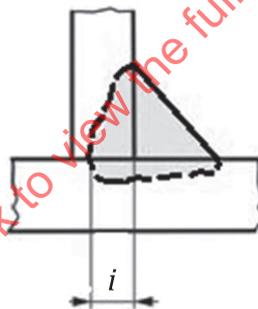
Partial penetration in a fillet joint, *i*-measure is used
